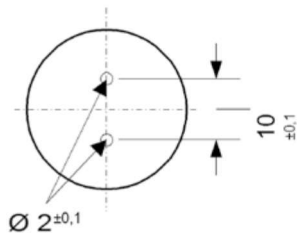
SI - Standard 2 pin snap in version and mounting hole dimensions (mm)
